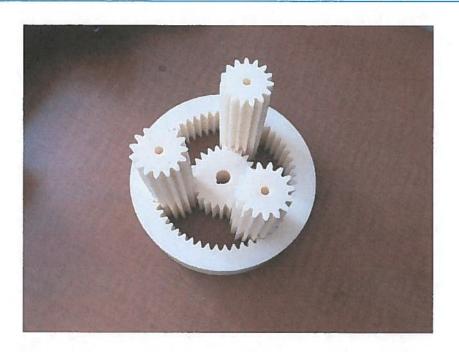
3D Printed Gearset Extruded and Ready to Cut
